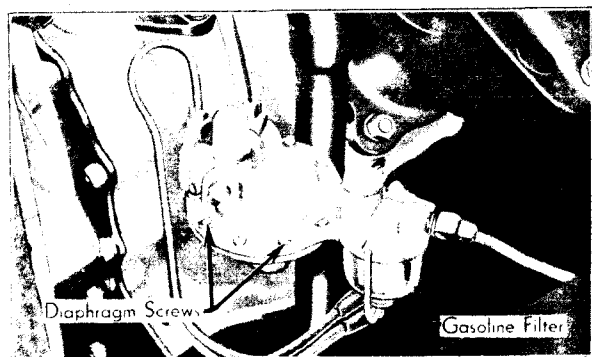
The fuel pump is mounted on the front left-hand side of the engine.
